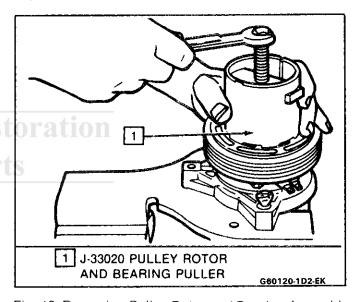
Removing Pulley Rotor and Bearing Assembly
